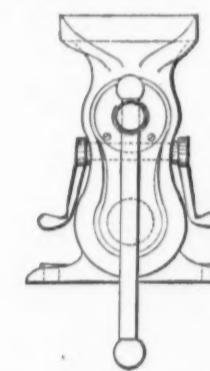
End View of the Vise, showing the Disengaging Handles.
